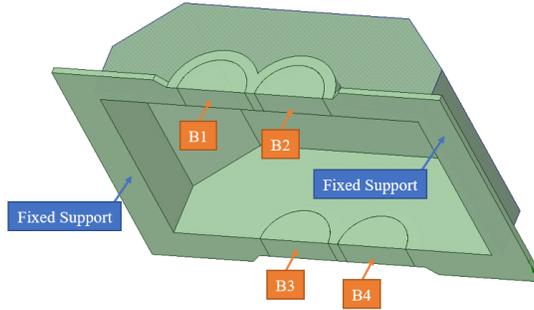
Location of the excitation for each bearing: Bearing 1 (B1), Bearing 2 (B2), Bearing 3 (B3), Bearing 4 (B4); and the Fixed Support Boundary Conditions.
